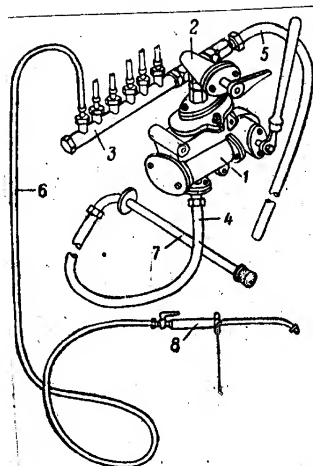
Feeding system of the ADM-750 Auto-degasification machine. 1, hand pump; 2, tridirectional valve; 3, collector; 4, siphoning hose; 5, pressure hose; 6, distribution hose; 7, receiving siphoning pipe; 8, nozzle.
